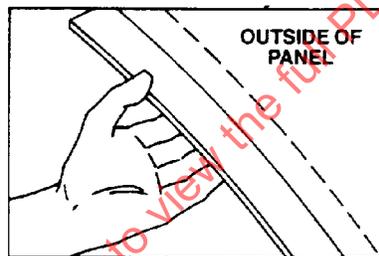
ASSEMBLE AND POSITION BONDING STRIPS
